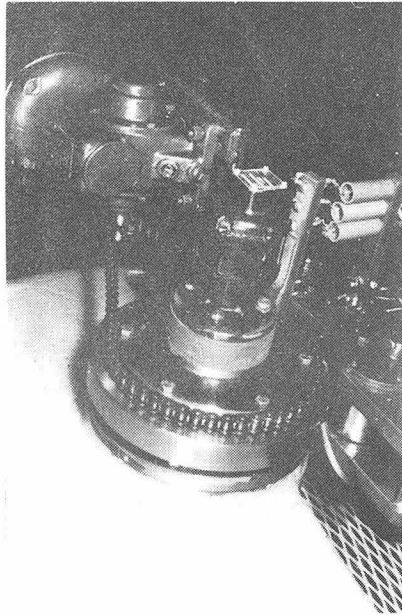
DYNAMOMETER SUPPORT BEARINGS
